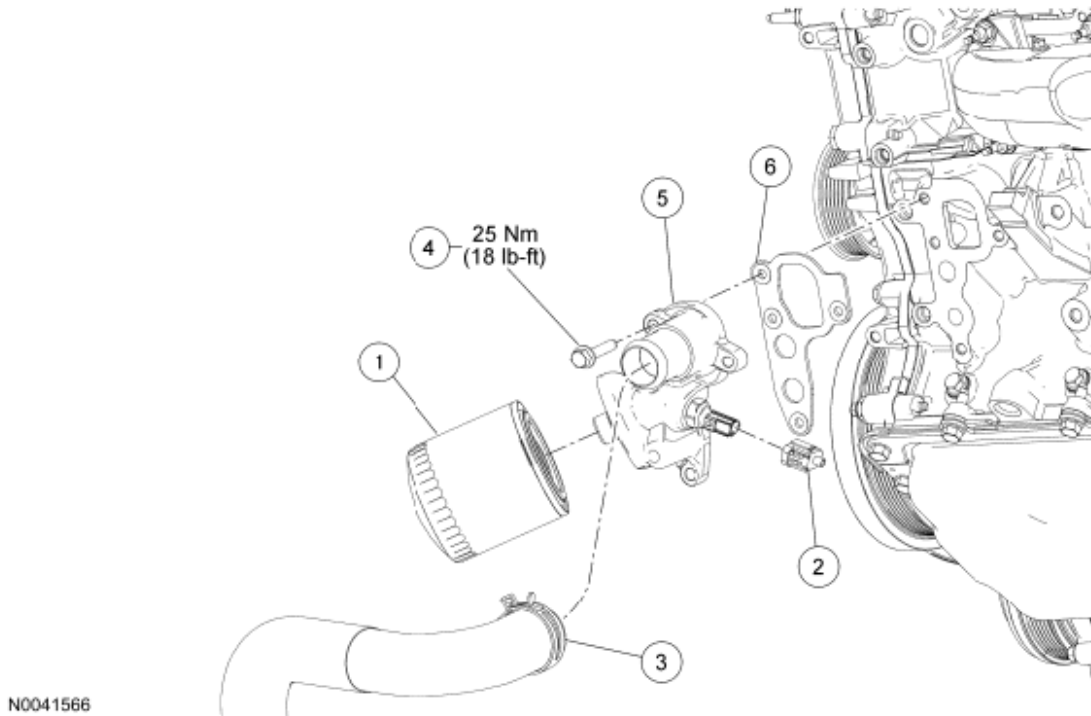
Identifying Oil Filter Adapter Components With Torque Specifications
